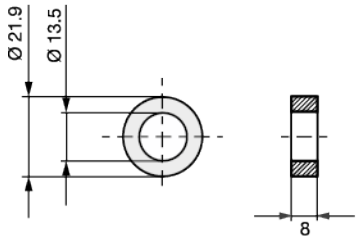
Installation dimensions of BTL-P-1014-2R magnet
